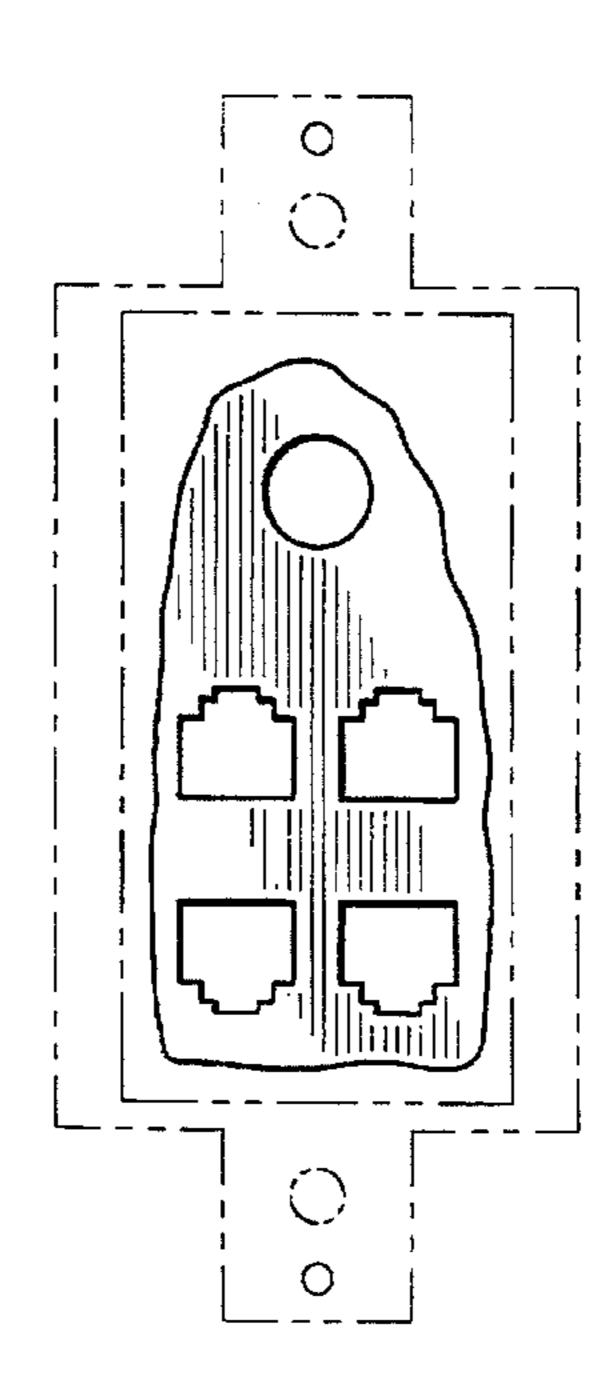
is a front elevational view of a further embodiment of a portion of a decorative mounting plate for electrical communications connections showing my new design, this embodiment being a unibody faceplate including a one-gang opening therein;
